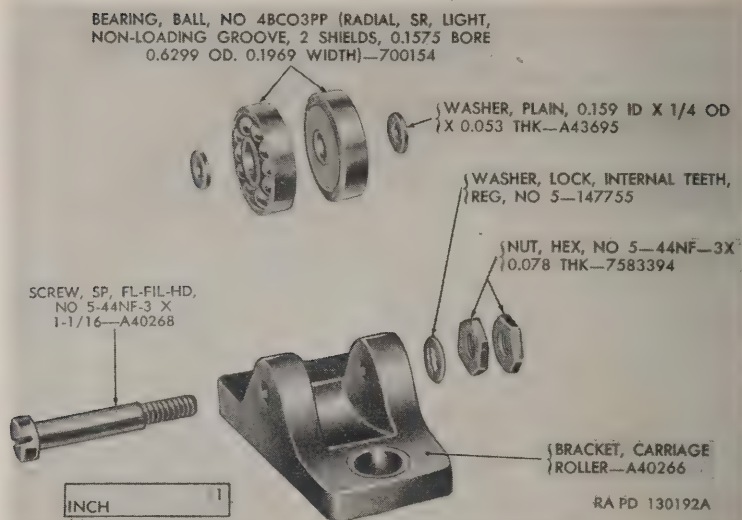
Components of the carriage roller assembly—sound-ranging plotting board M1 or M1A1.
